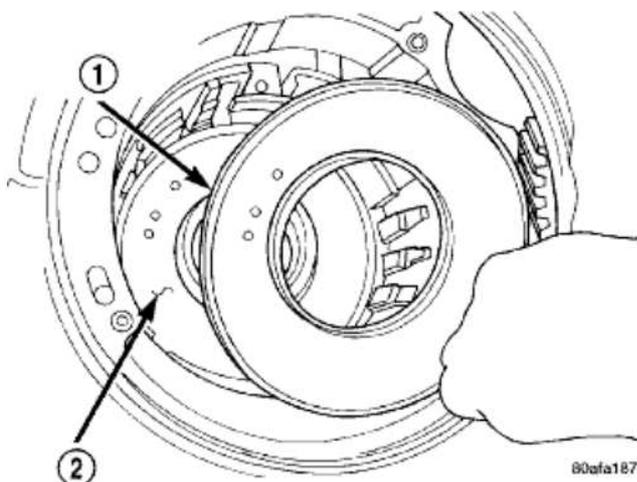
Removing/Installing Low/Reverse Piston Retainer
